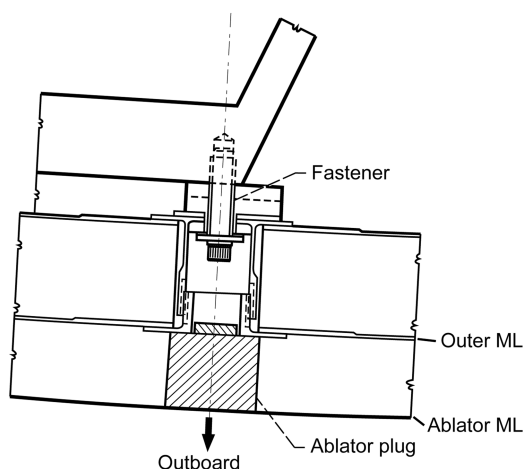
Mechanical attachment of the heat shield to substructure with protective ablator plug (Apollo drawing V36-320000).
